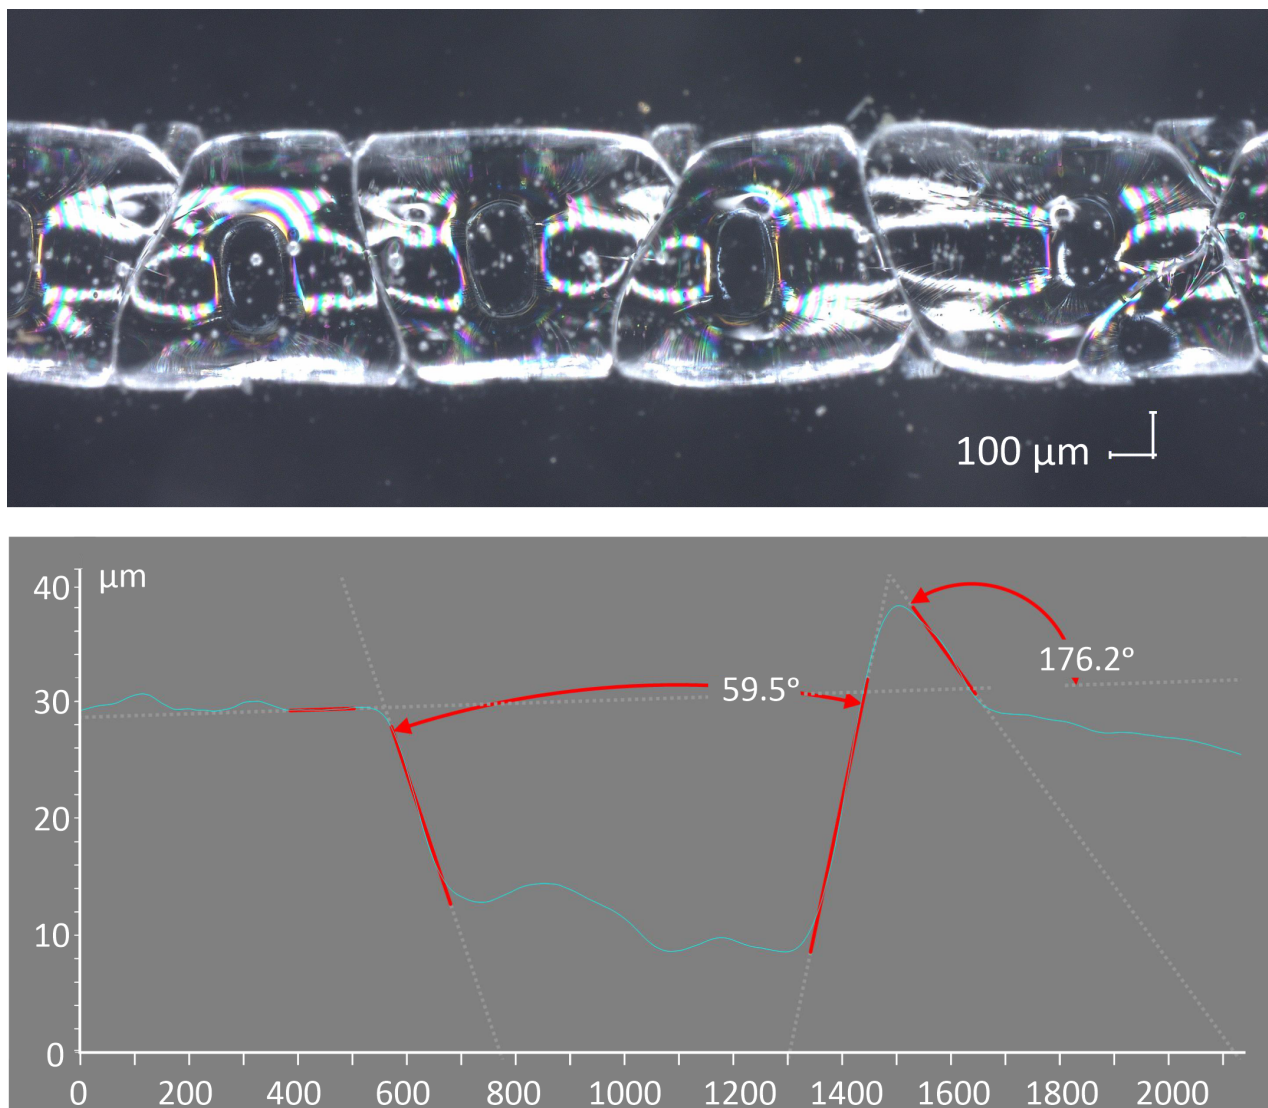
Groove before mechanical removal of cracked deposit. (Top): Microscope view of groove. (Bottom): Cross-sectional profile.
